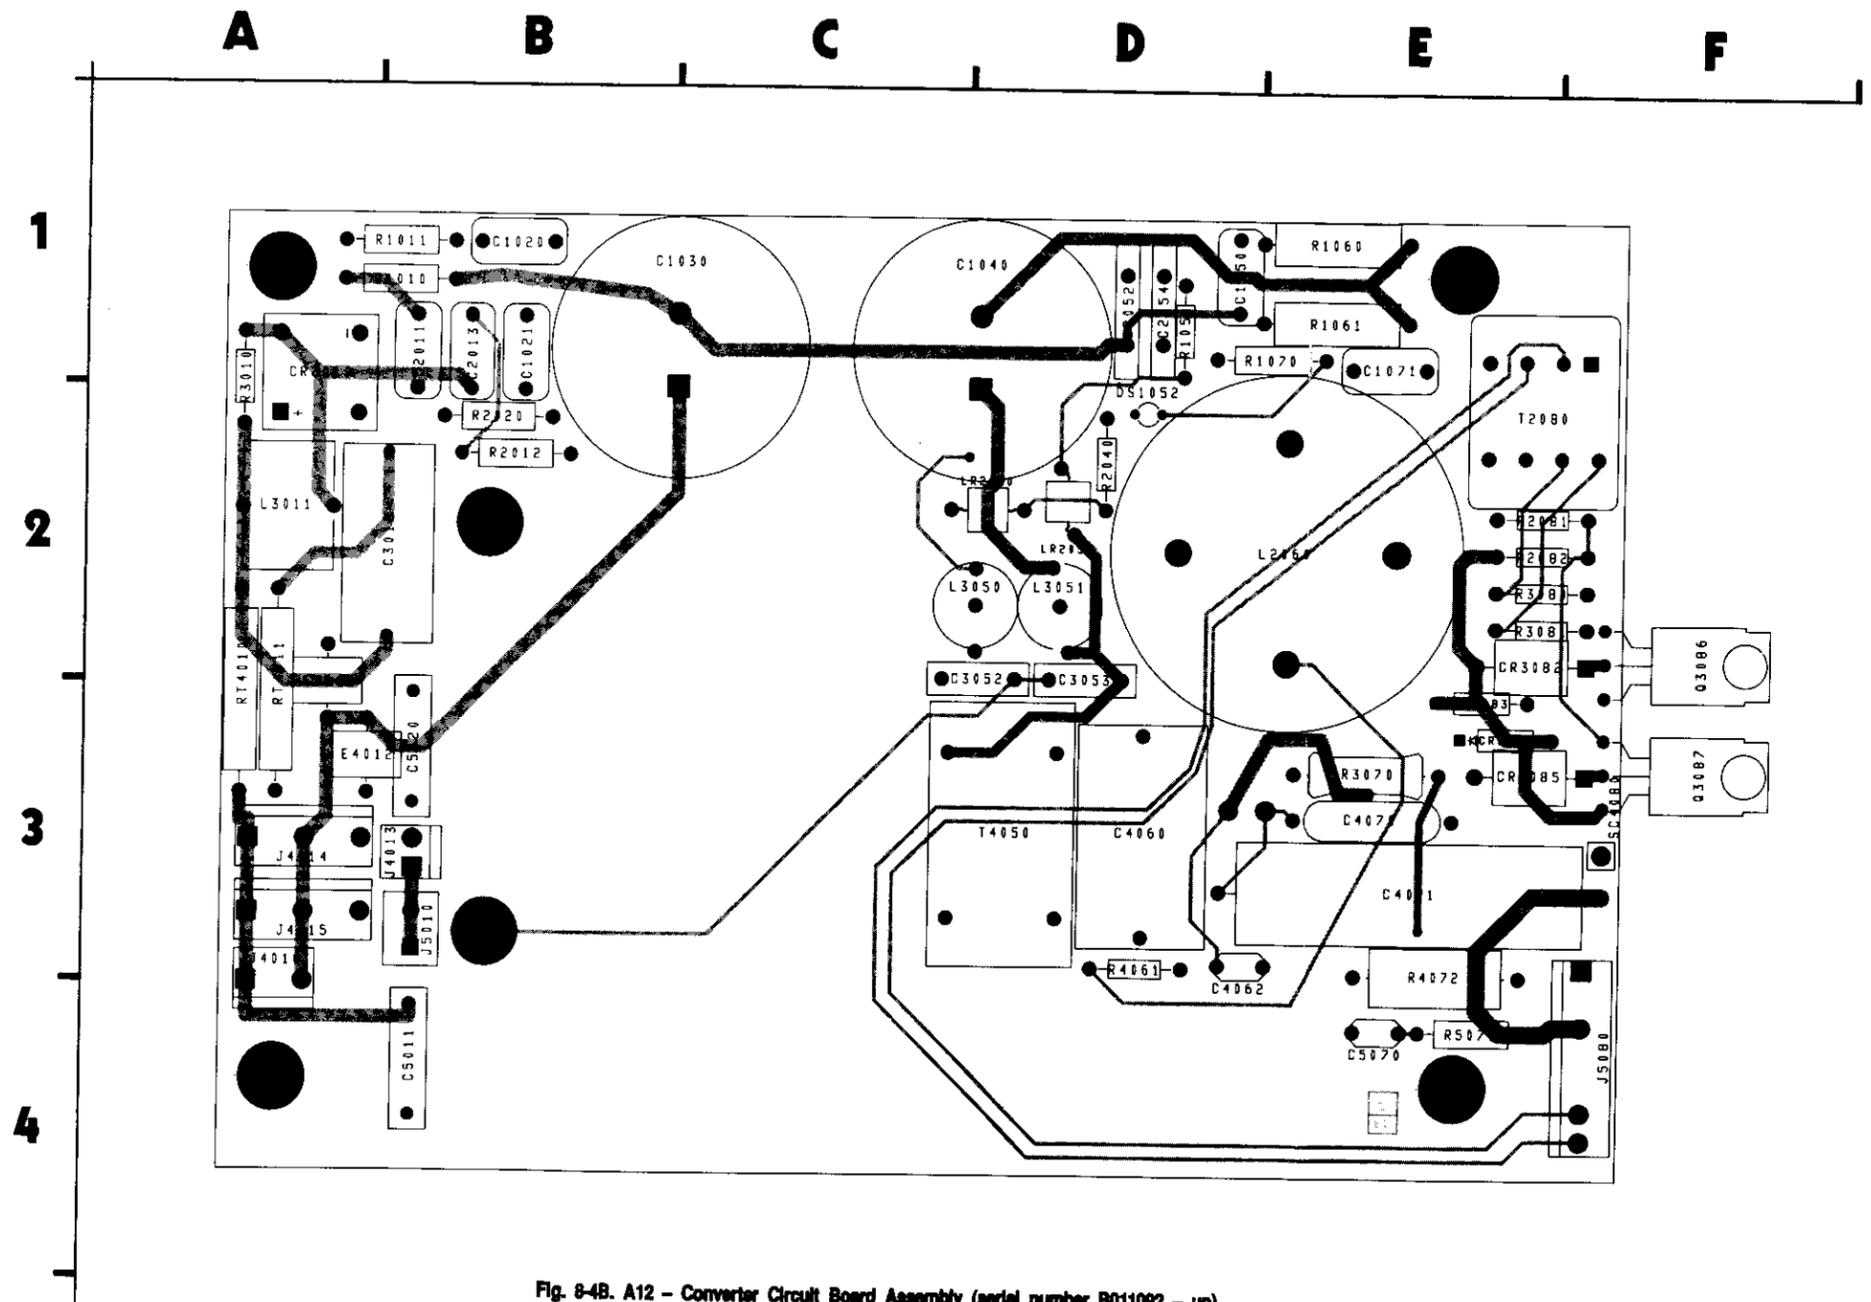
B. A12 - Converter Circuit Board Assembly (serial number B011082 - up)
